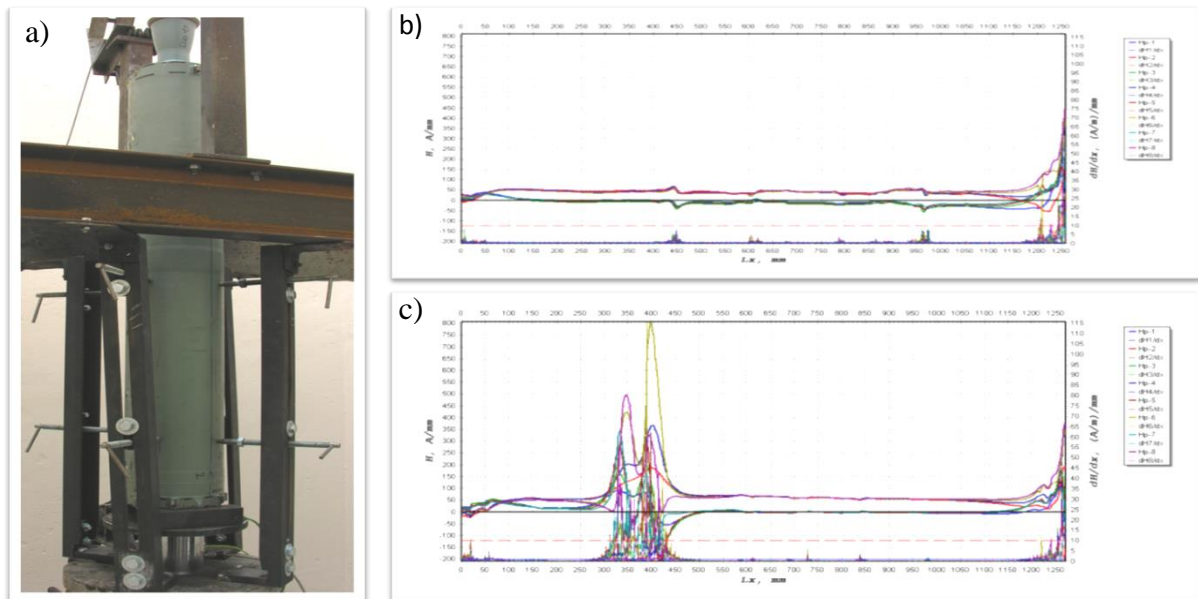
a) Rocket motor on test bed, b) Magnetograph taken before motor ignition, c) Magnetograph after motor burning out.
